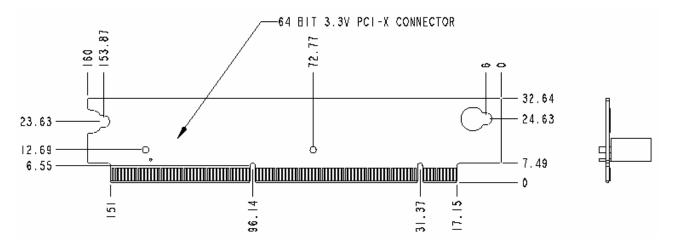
1U Low-Profile PCI-X Riser Card Mechanical Drawing
